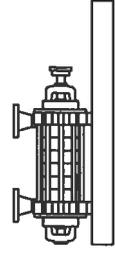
Impeller between bearings — flexibly coupled — multistage — radial split case
